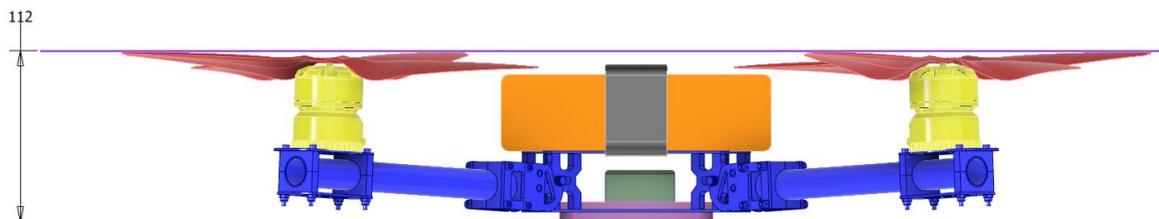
Front view of drone with dimension of height from the mounting plate to the ends of propellers in mm
